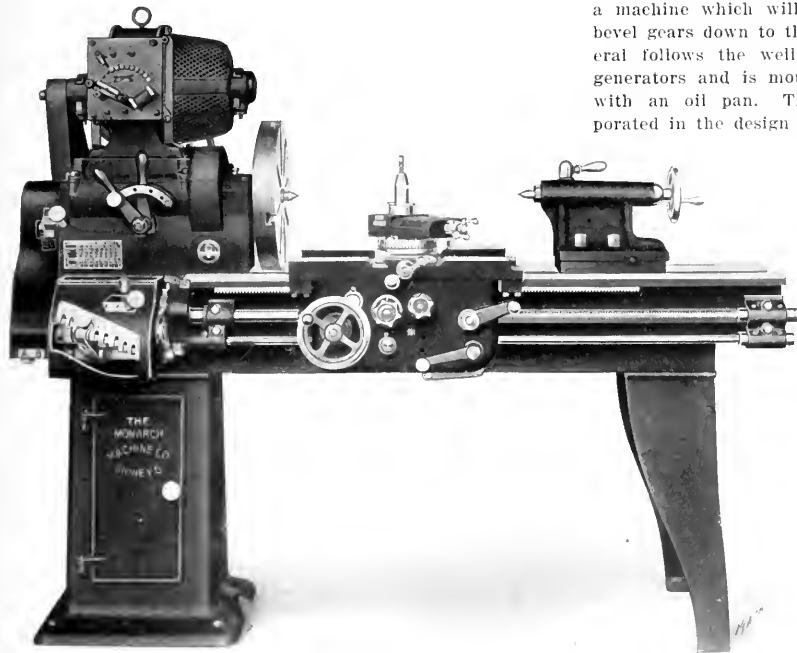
Monarch 16-inch Lathe equipped with Electric Motor Drive
